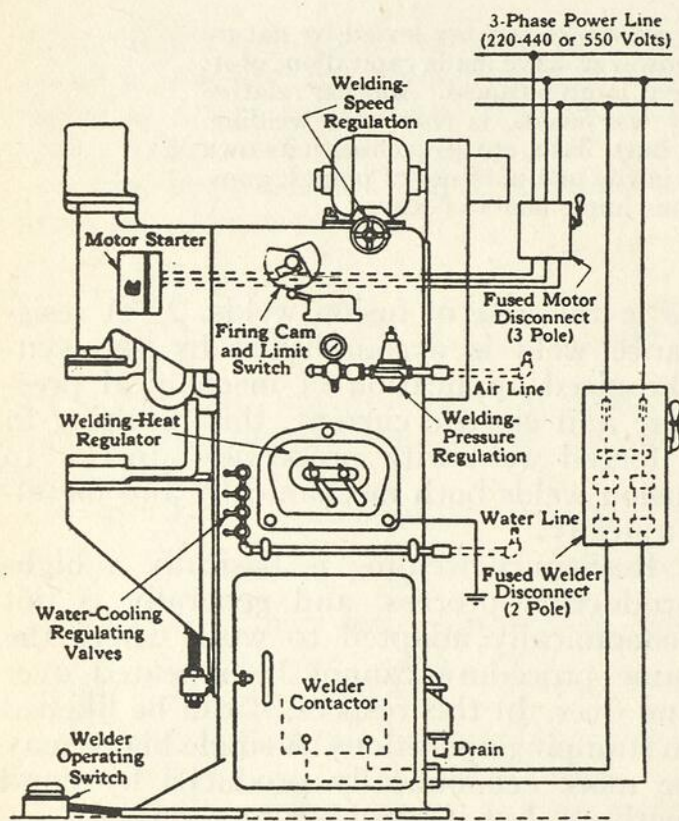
Press-type welder for use with materials more than  $\frac{1}{8}$  inch thick. Ranging from 30 to 400 kva, this type is operated by air, motor, or hydraulic means. A combination air-hydraulic operation is often used. While the press type is basically a projection welder, many have provision for spot-welding use also.
